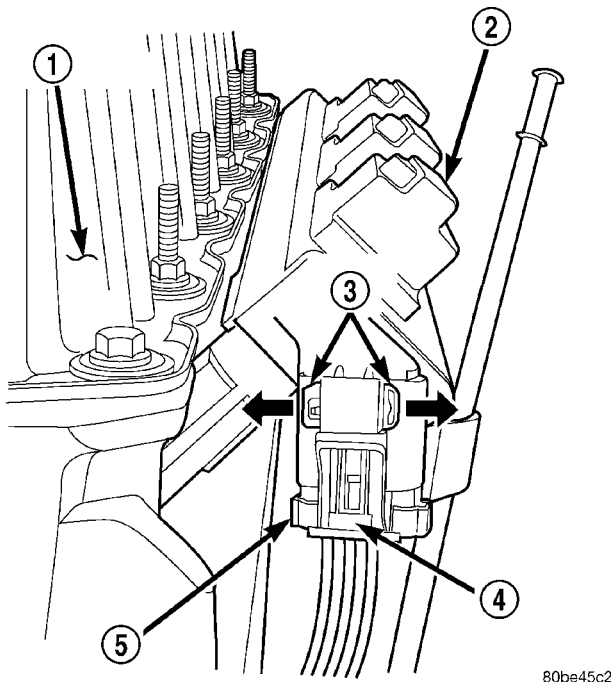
Ignition Coil Electrical Connector—4.0L 6-Cylinder Engine
